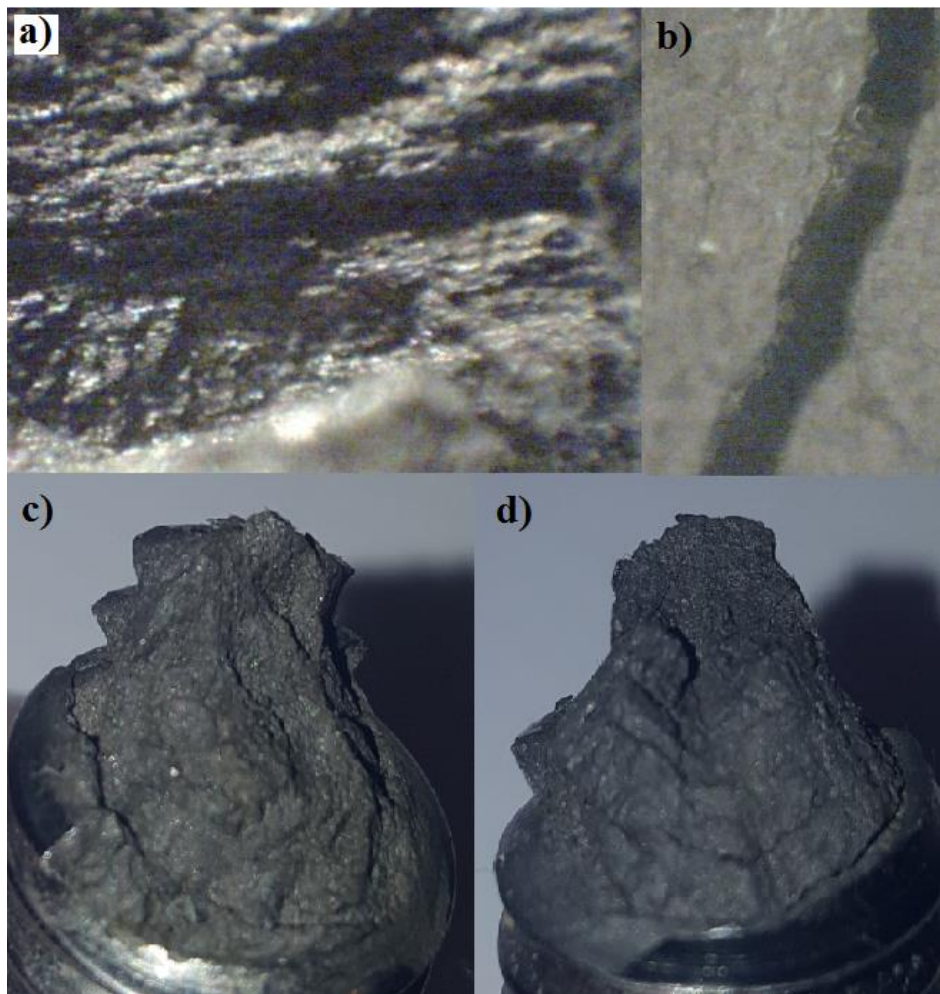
Details of the fractures. a) showing the surface of the fracture (10X), b) showing the crack in the nut for SA:1 (10X), c) the surface of the fracture for SA:2 and d) showing the surface of the fracture for CS:2
